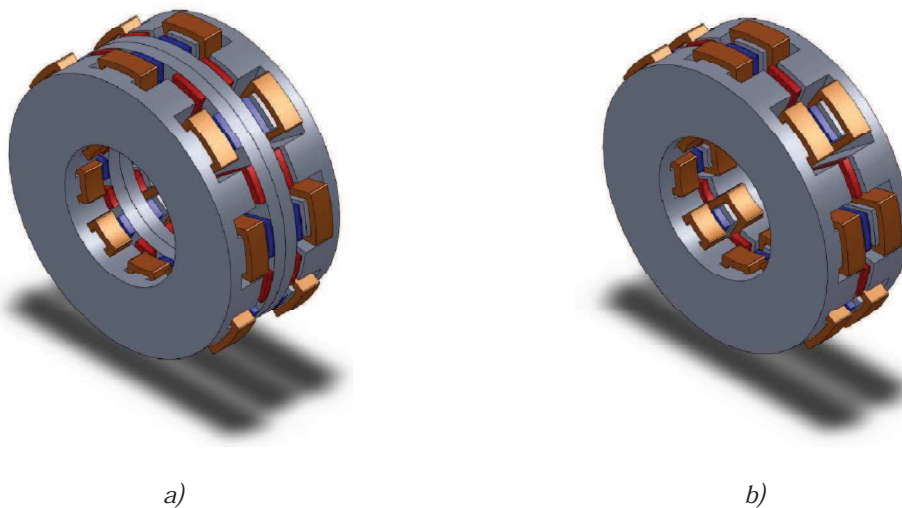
Interior rotor machines: a) with ferromagnetic core in the rotor and b) coreless rotor
